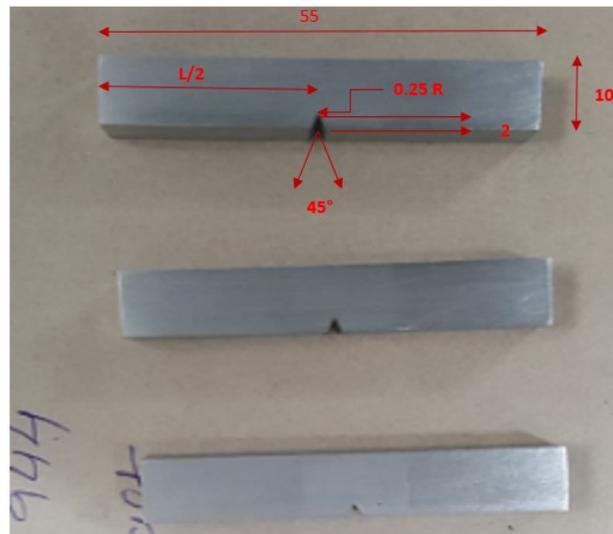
One Set (3 specimens) for V Notch Charpy Impact Test as per ASTM A 370-14
